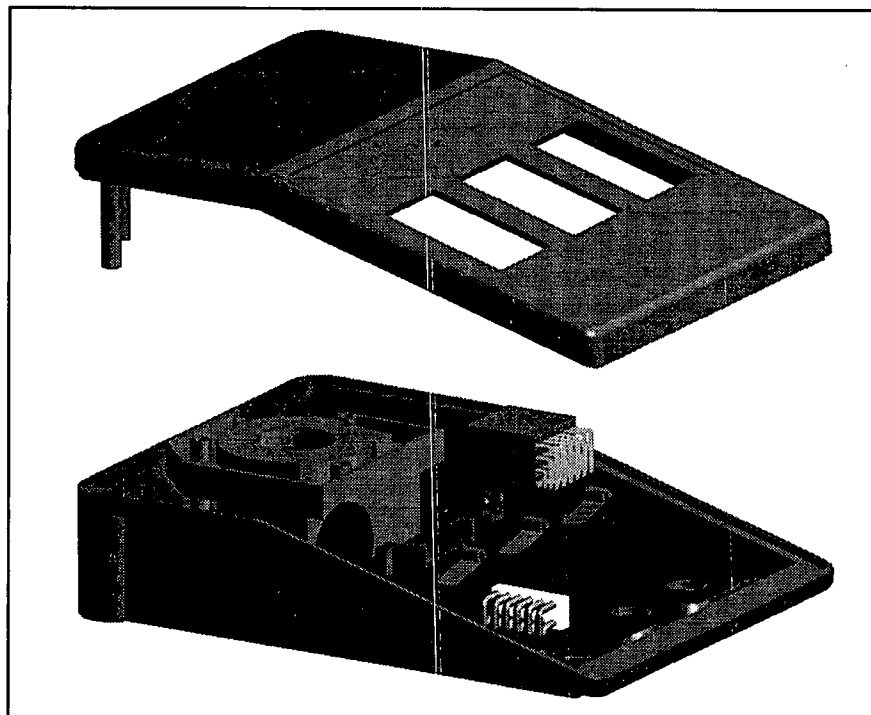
A Semi-exploded Solids Model of a Computer Mouse Assembly.
